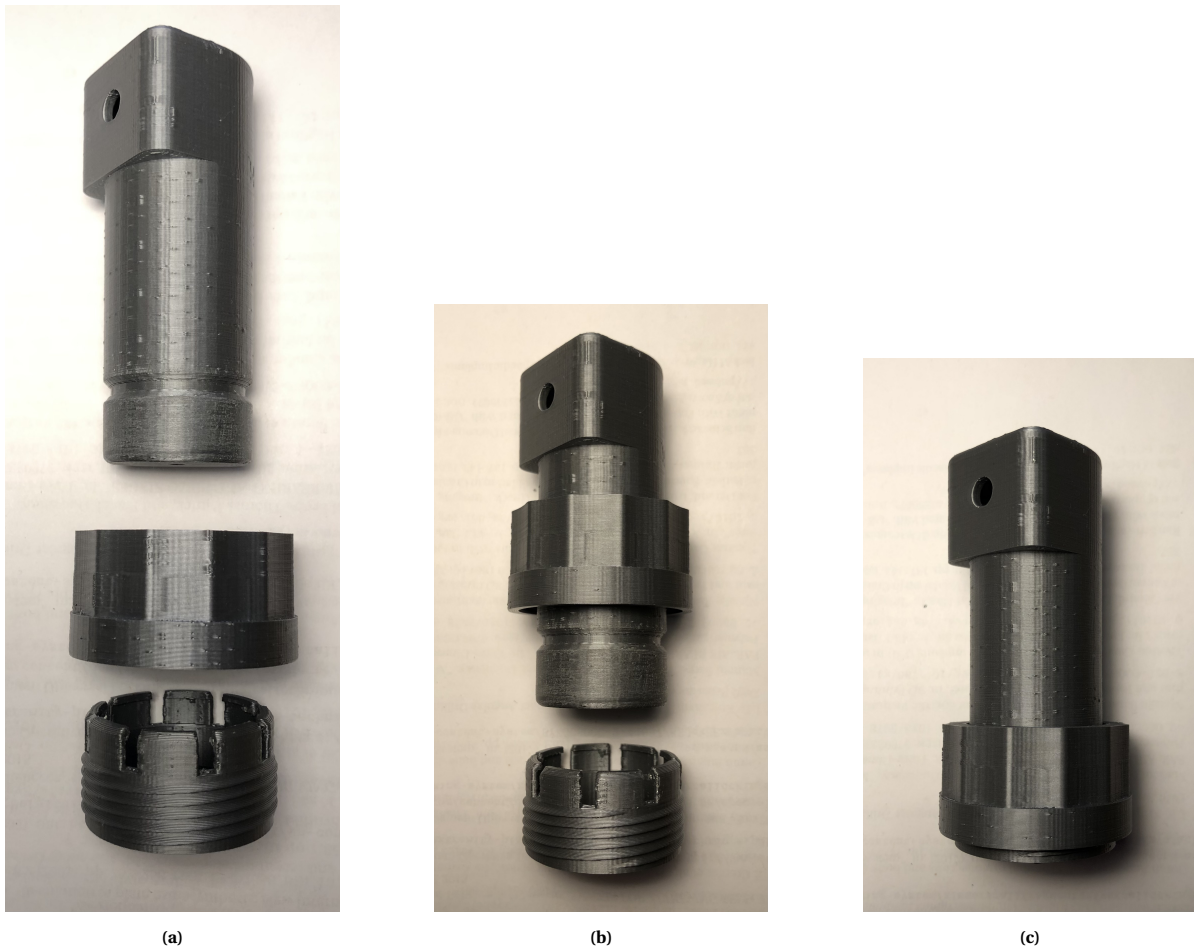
3D-printed demonstrator of the module and locking guide mechanism. a: exploded view of the three components; b: The swivel cap is slid on the module; c: The swivel cap is twisted on the locking guide. The module is fixated in place. Fabricated in PLA using a Prusa MK3S+ 3D printer.
